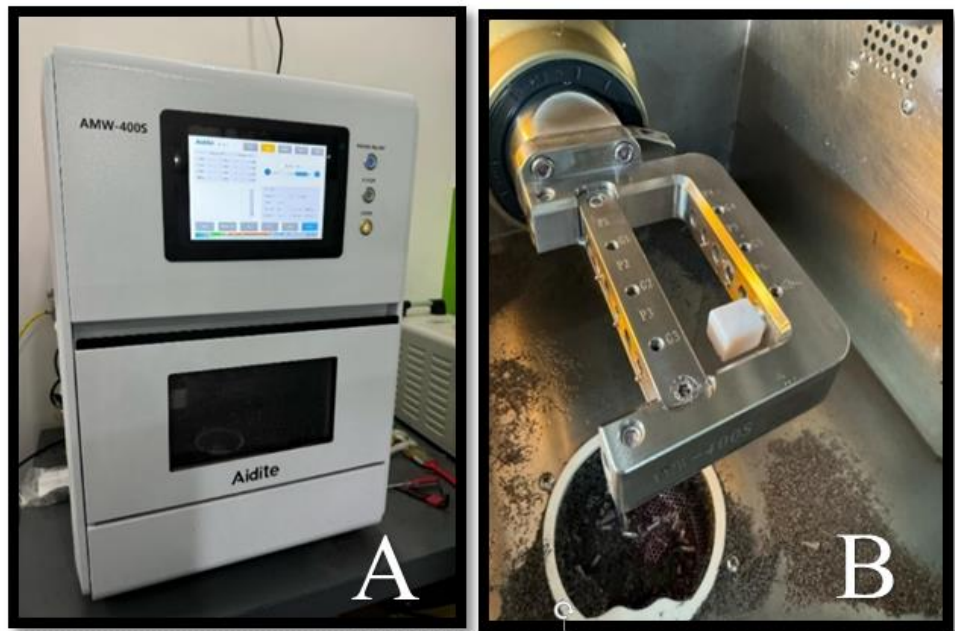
A: Aidite milling machine B: glass ceramic ingot mounted in the holder
